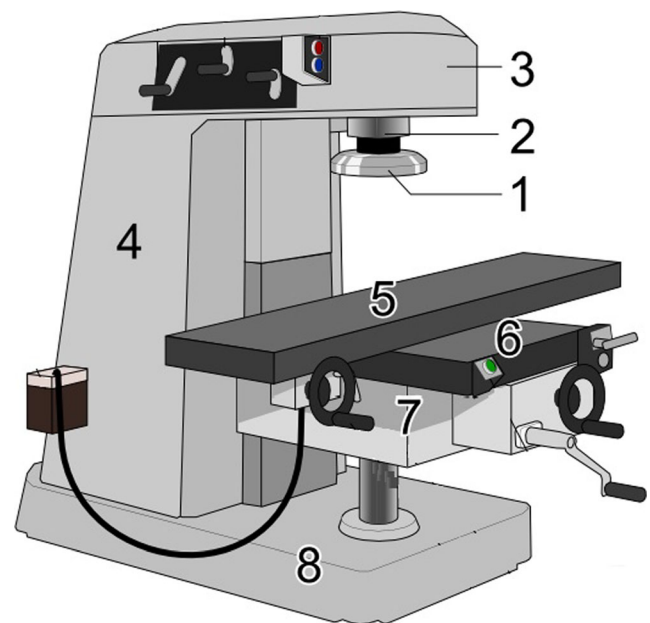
Vertical milling machine. 1 Milling cutter. 2 Spindle. 3 Top slide or overarm. 4 Column. 5 Table. 6 Y-axis slide. 7 Knee. 8 Base
